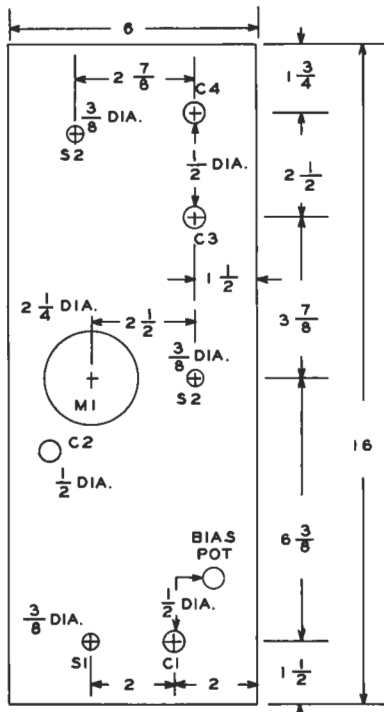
PANEL LAYOUT DIAGRAM for the amplifier. Only major hole locations are shown. Locations of small holes for hardware should be located from the part being mounted. Cut meter hole to a diameter slightly larger than case of meter.
